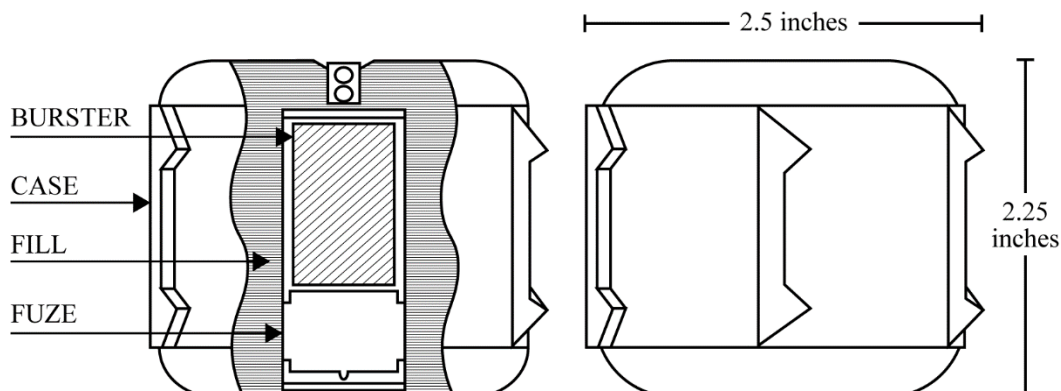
Bomblet, 2.5-inches, E139 - Line Drawing
